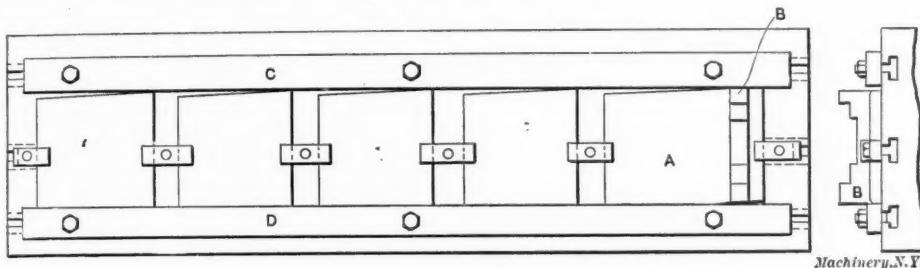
"String" of Fixtures on the Platen of a Planer.
